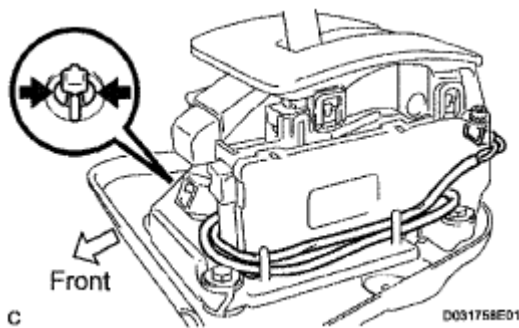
Removing Indicator Light Wire Connector From Shift Lever Plate
